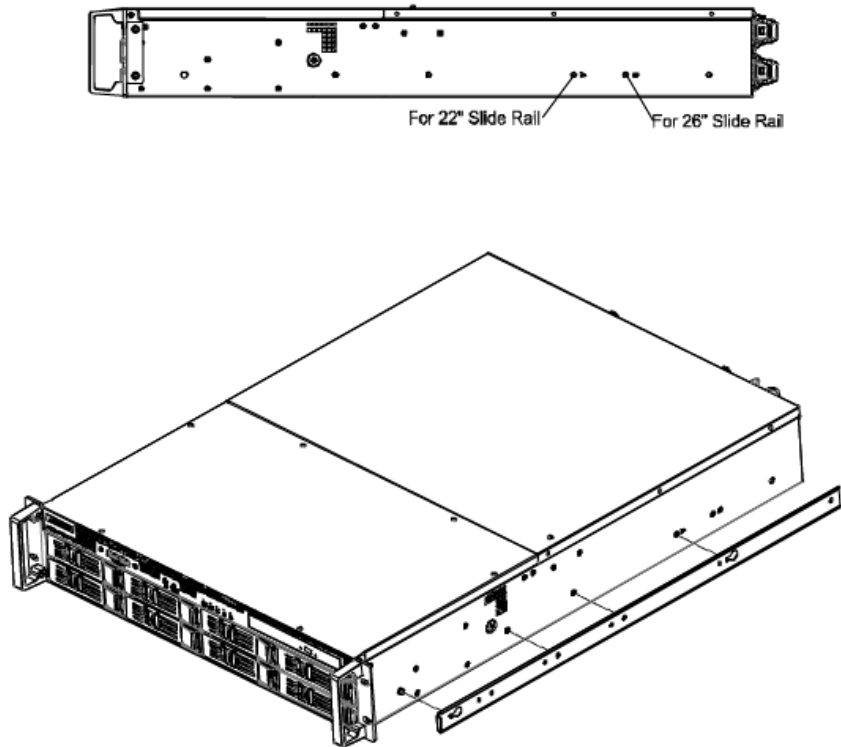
Attaching a slide rail to the chassis/ 安装滑轨内轨 / 安装滑軌內軌
